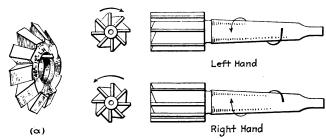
R. H. and L. H. cutters; (a) shows 48°-12° L. H. double angle cutter.
